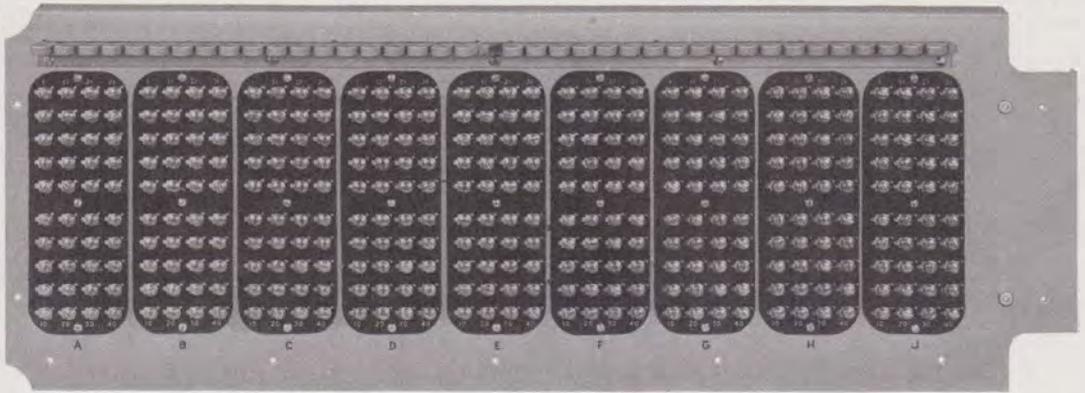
Terminal Plate Assembly Per ED-69366-50 Group 3
